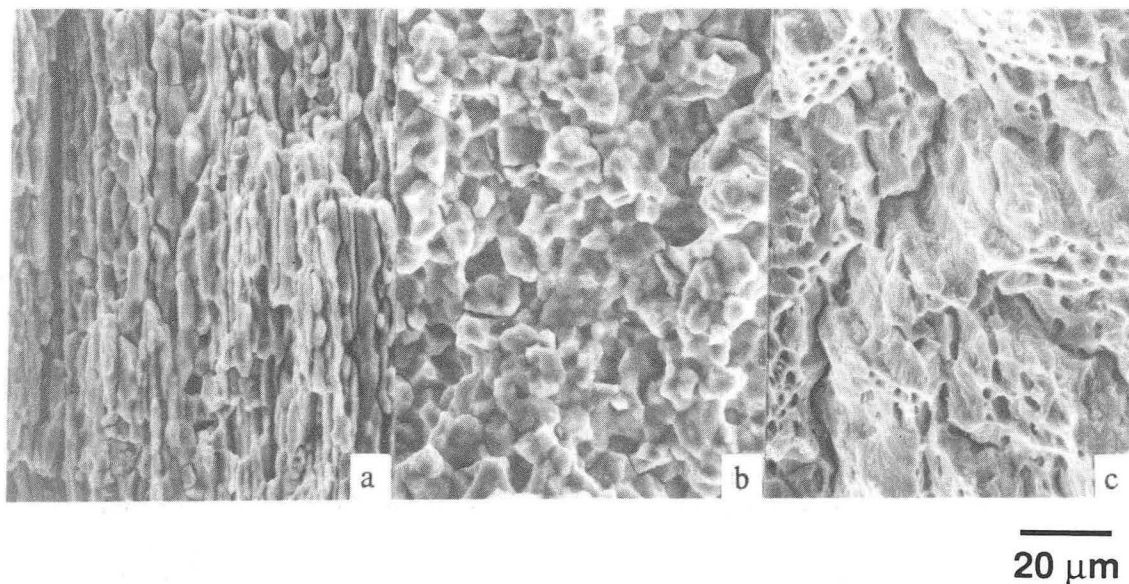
SEM fractographs of: (a) base metal; (b) EB weldment; and (c) GTA weldment tested at 77 K. (XBB897-5597-B)
